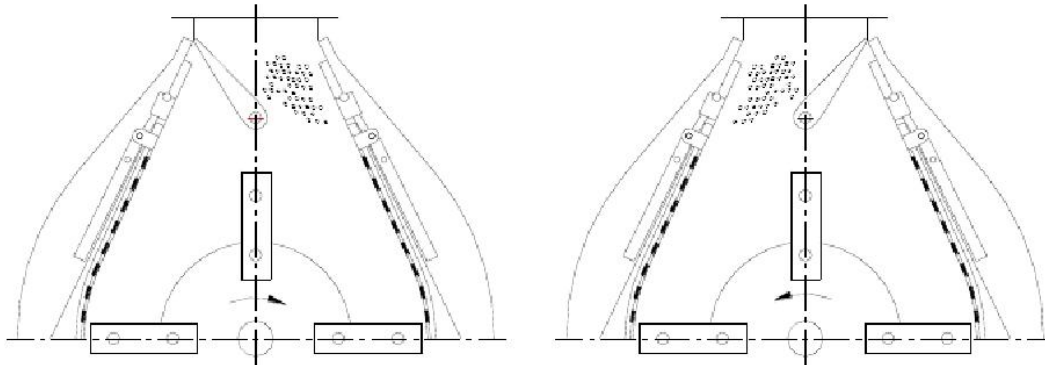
Schematic diagram of feed guide plate direction and spindle steering
